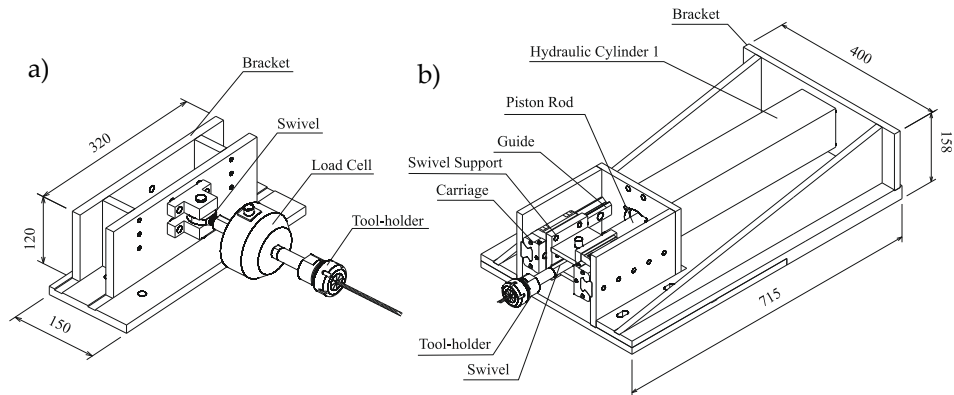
a) Bracket 1 drawing. b) Bracket 2 drawing.
